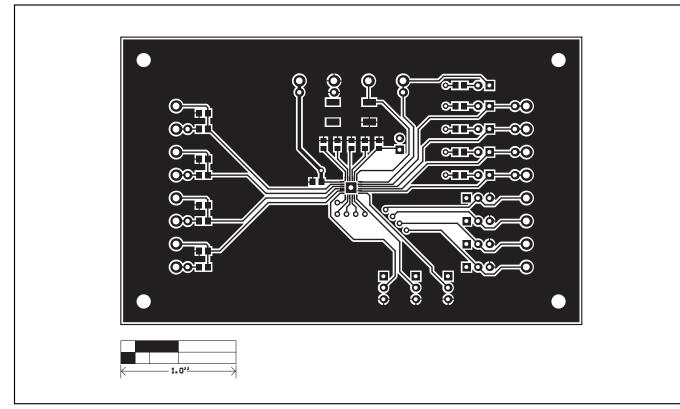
MAX16029EV Kit PCB Layout—Component Side
